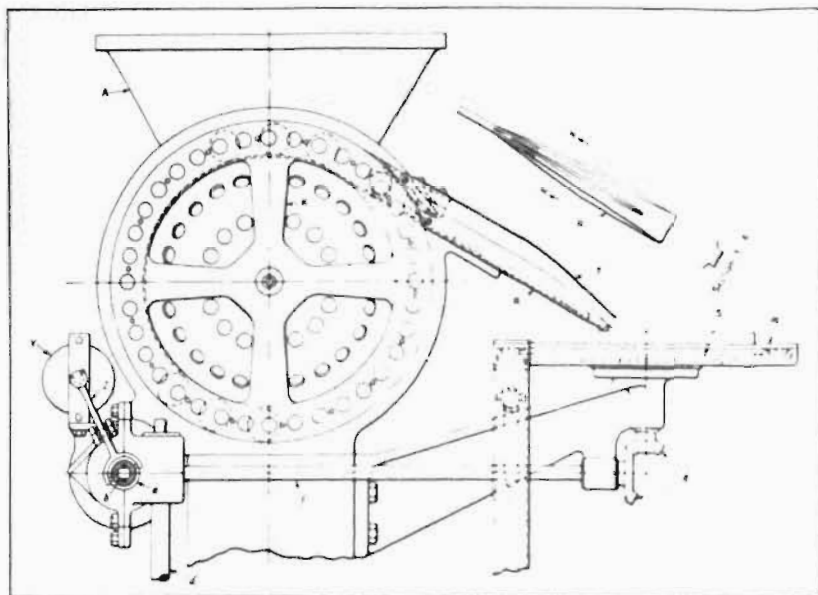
Hopper mechanism for feeding bottle caps to production machines.
